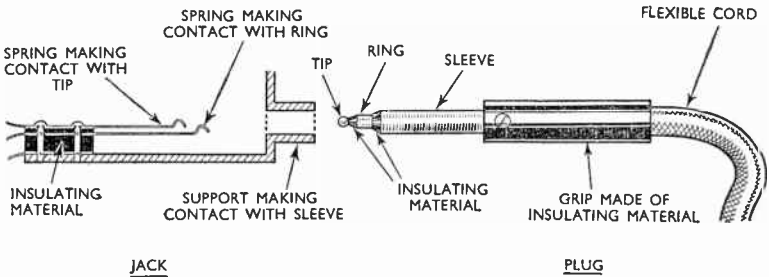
Section through a jack into which a plug (right) is inserted; it is employed to make quick connexion. The drawing is not to scale.
